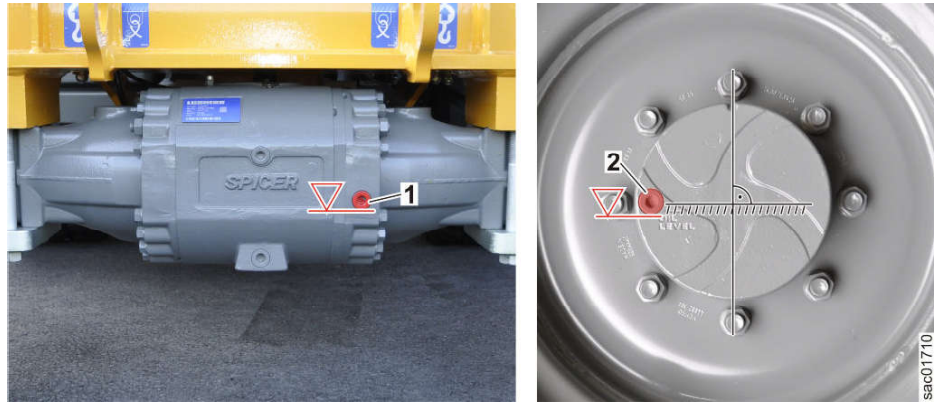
Checking the axle oil levels, the main housing and wheel hub
